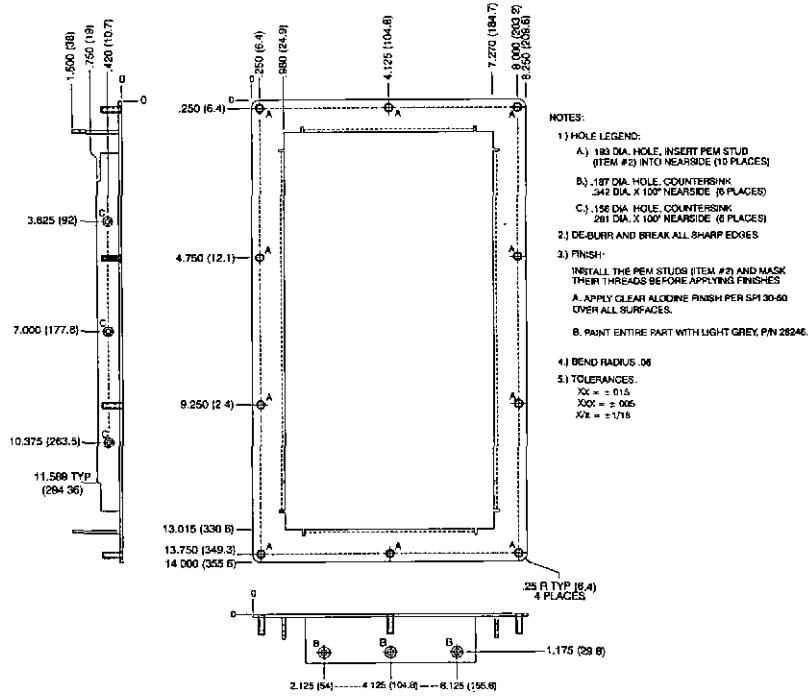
Front Panel Mounting Bracket, P/N 9336905100
